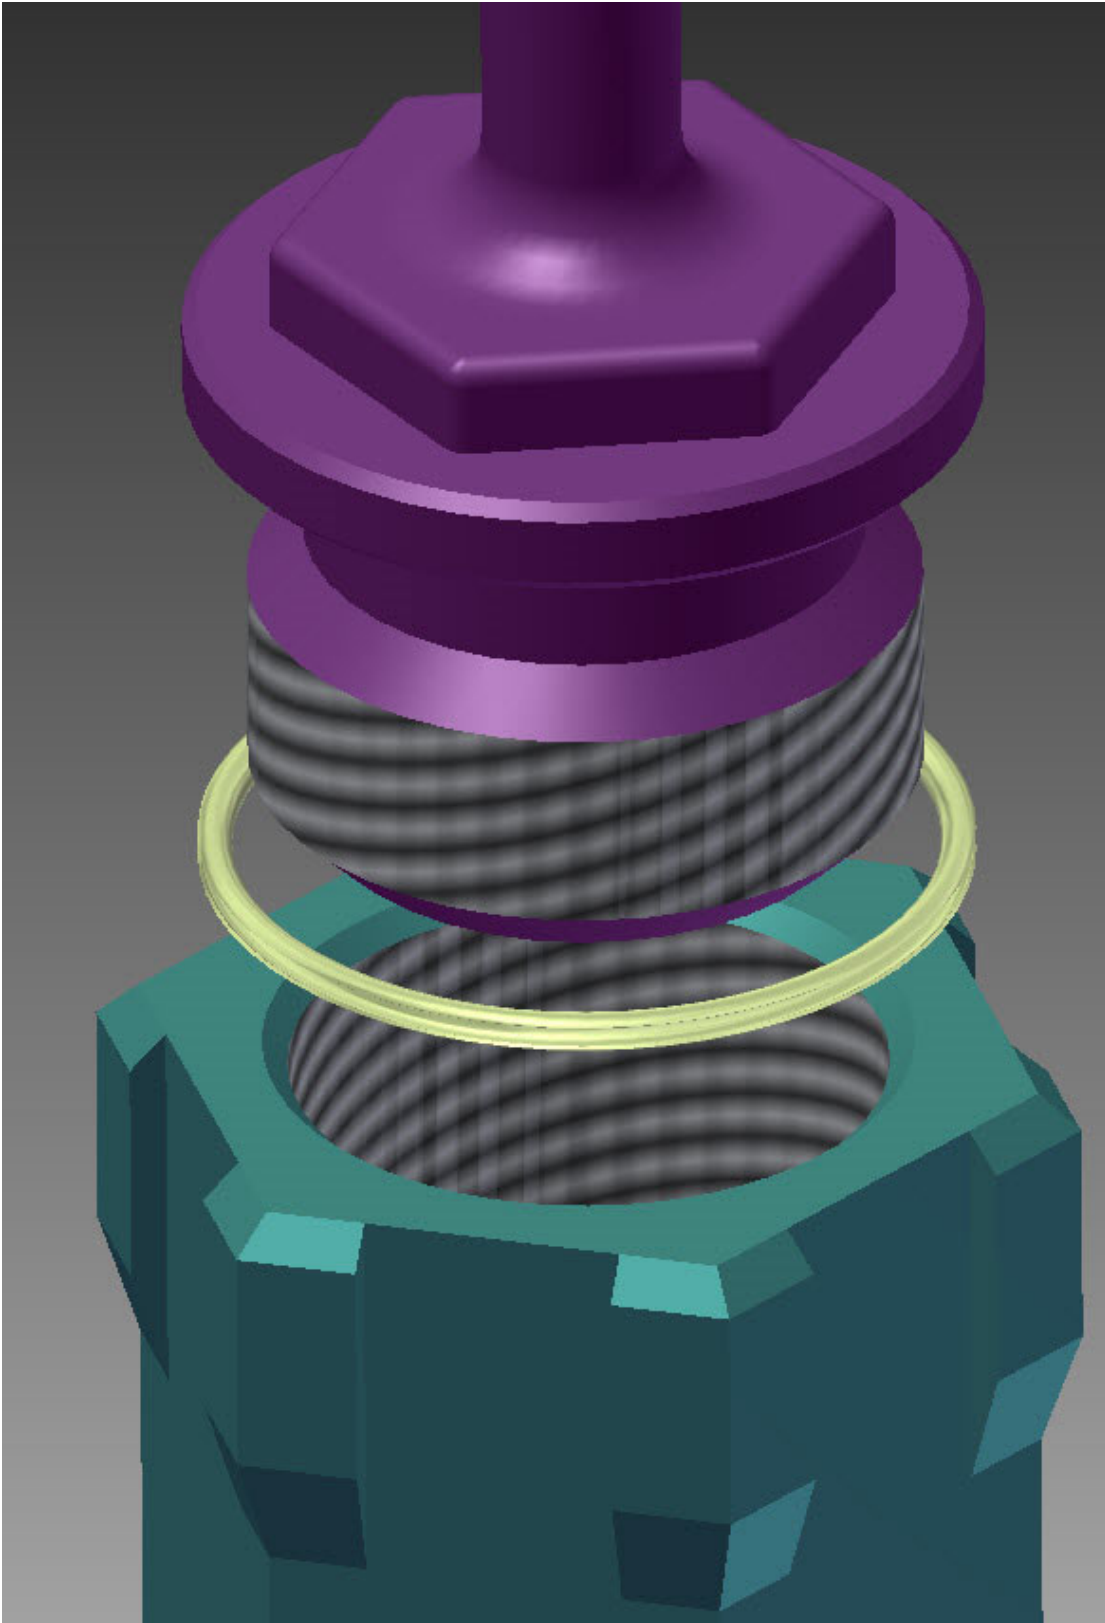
Exploded view of the top of the sample cassette, showing threaded portions and metal C-ring seal.
